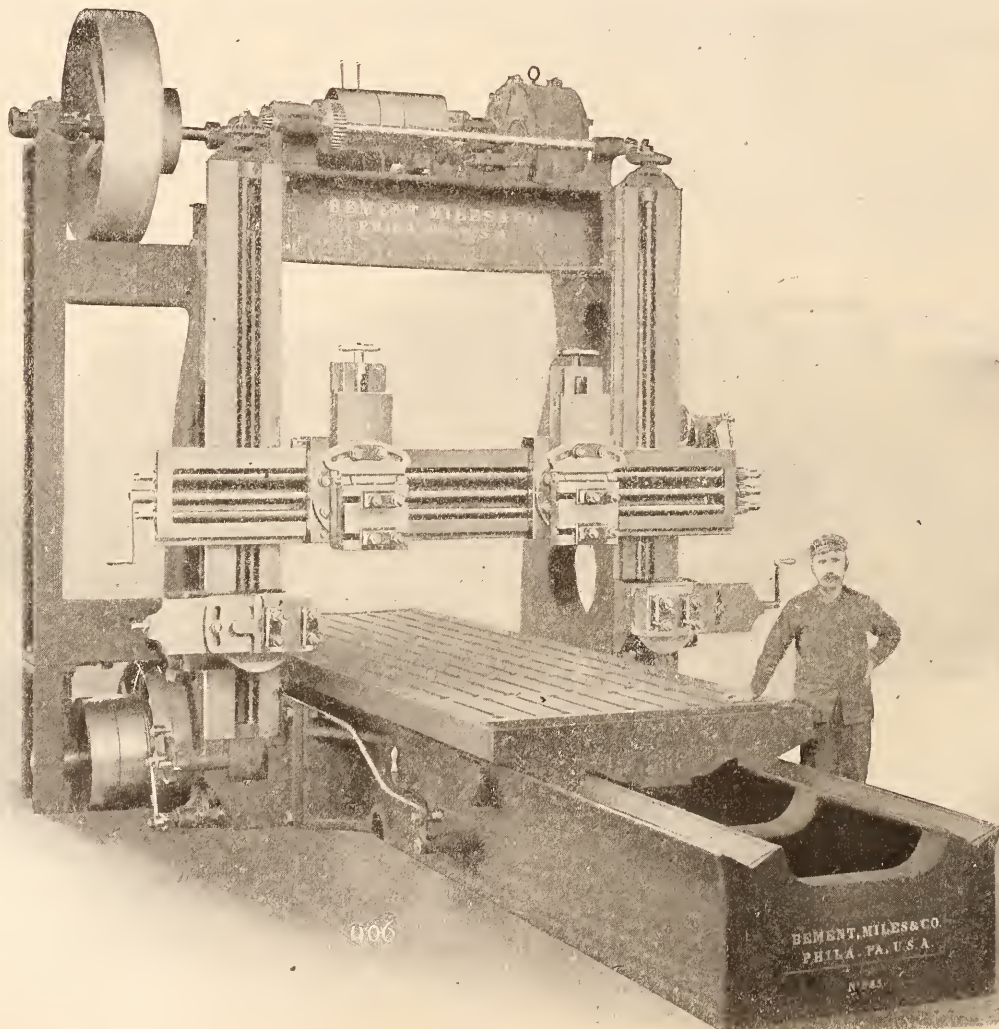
72-IN. MOTOR DRIVEN CYLINDER PLANING MACHINE—MANUFACTURED BY BEMENT, MILES & COMPANY, PHILADELPHIA, PA.
